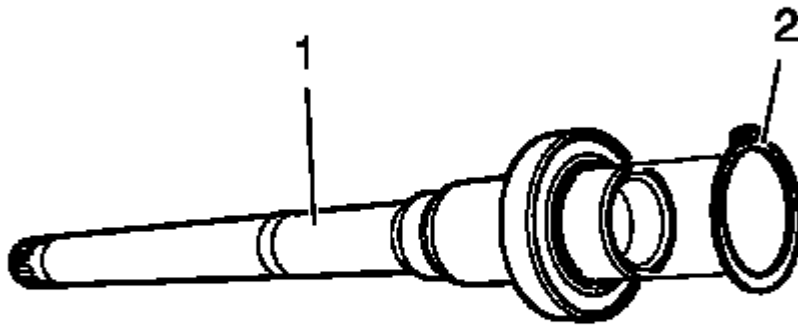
Identifying Intermediate Shaft Bearing Retaining Ring
